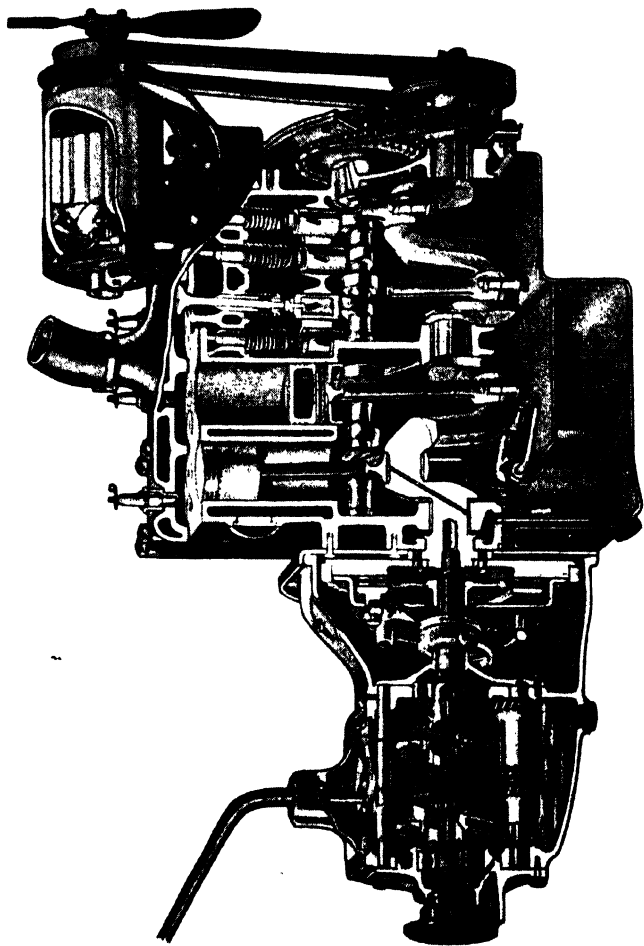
SECTIONAL ELEVATION OF THE AUSTIN EIGHT SIDE-VALVE ENGINE, SHOWING THE MAIN CONSTRUCTIONAL FEATURES; THREE-BEARING CRANKSHAFT, TIMING GEAR, ETC., TOGETHER WITH GEARBOX AND CLUTCH
